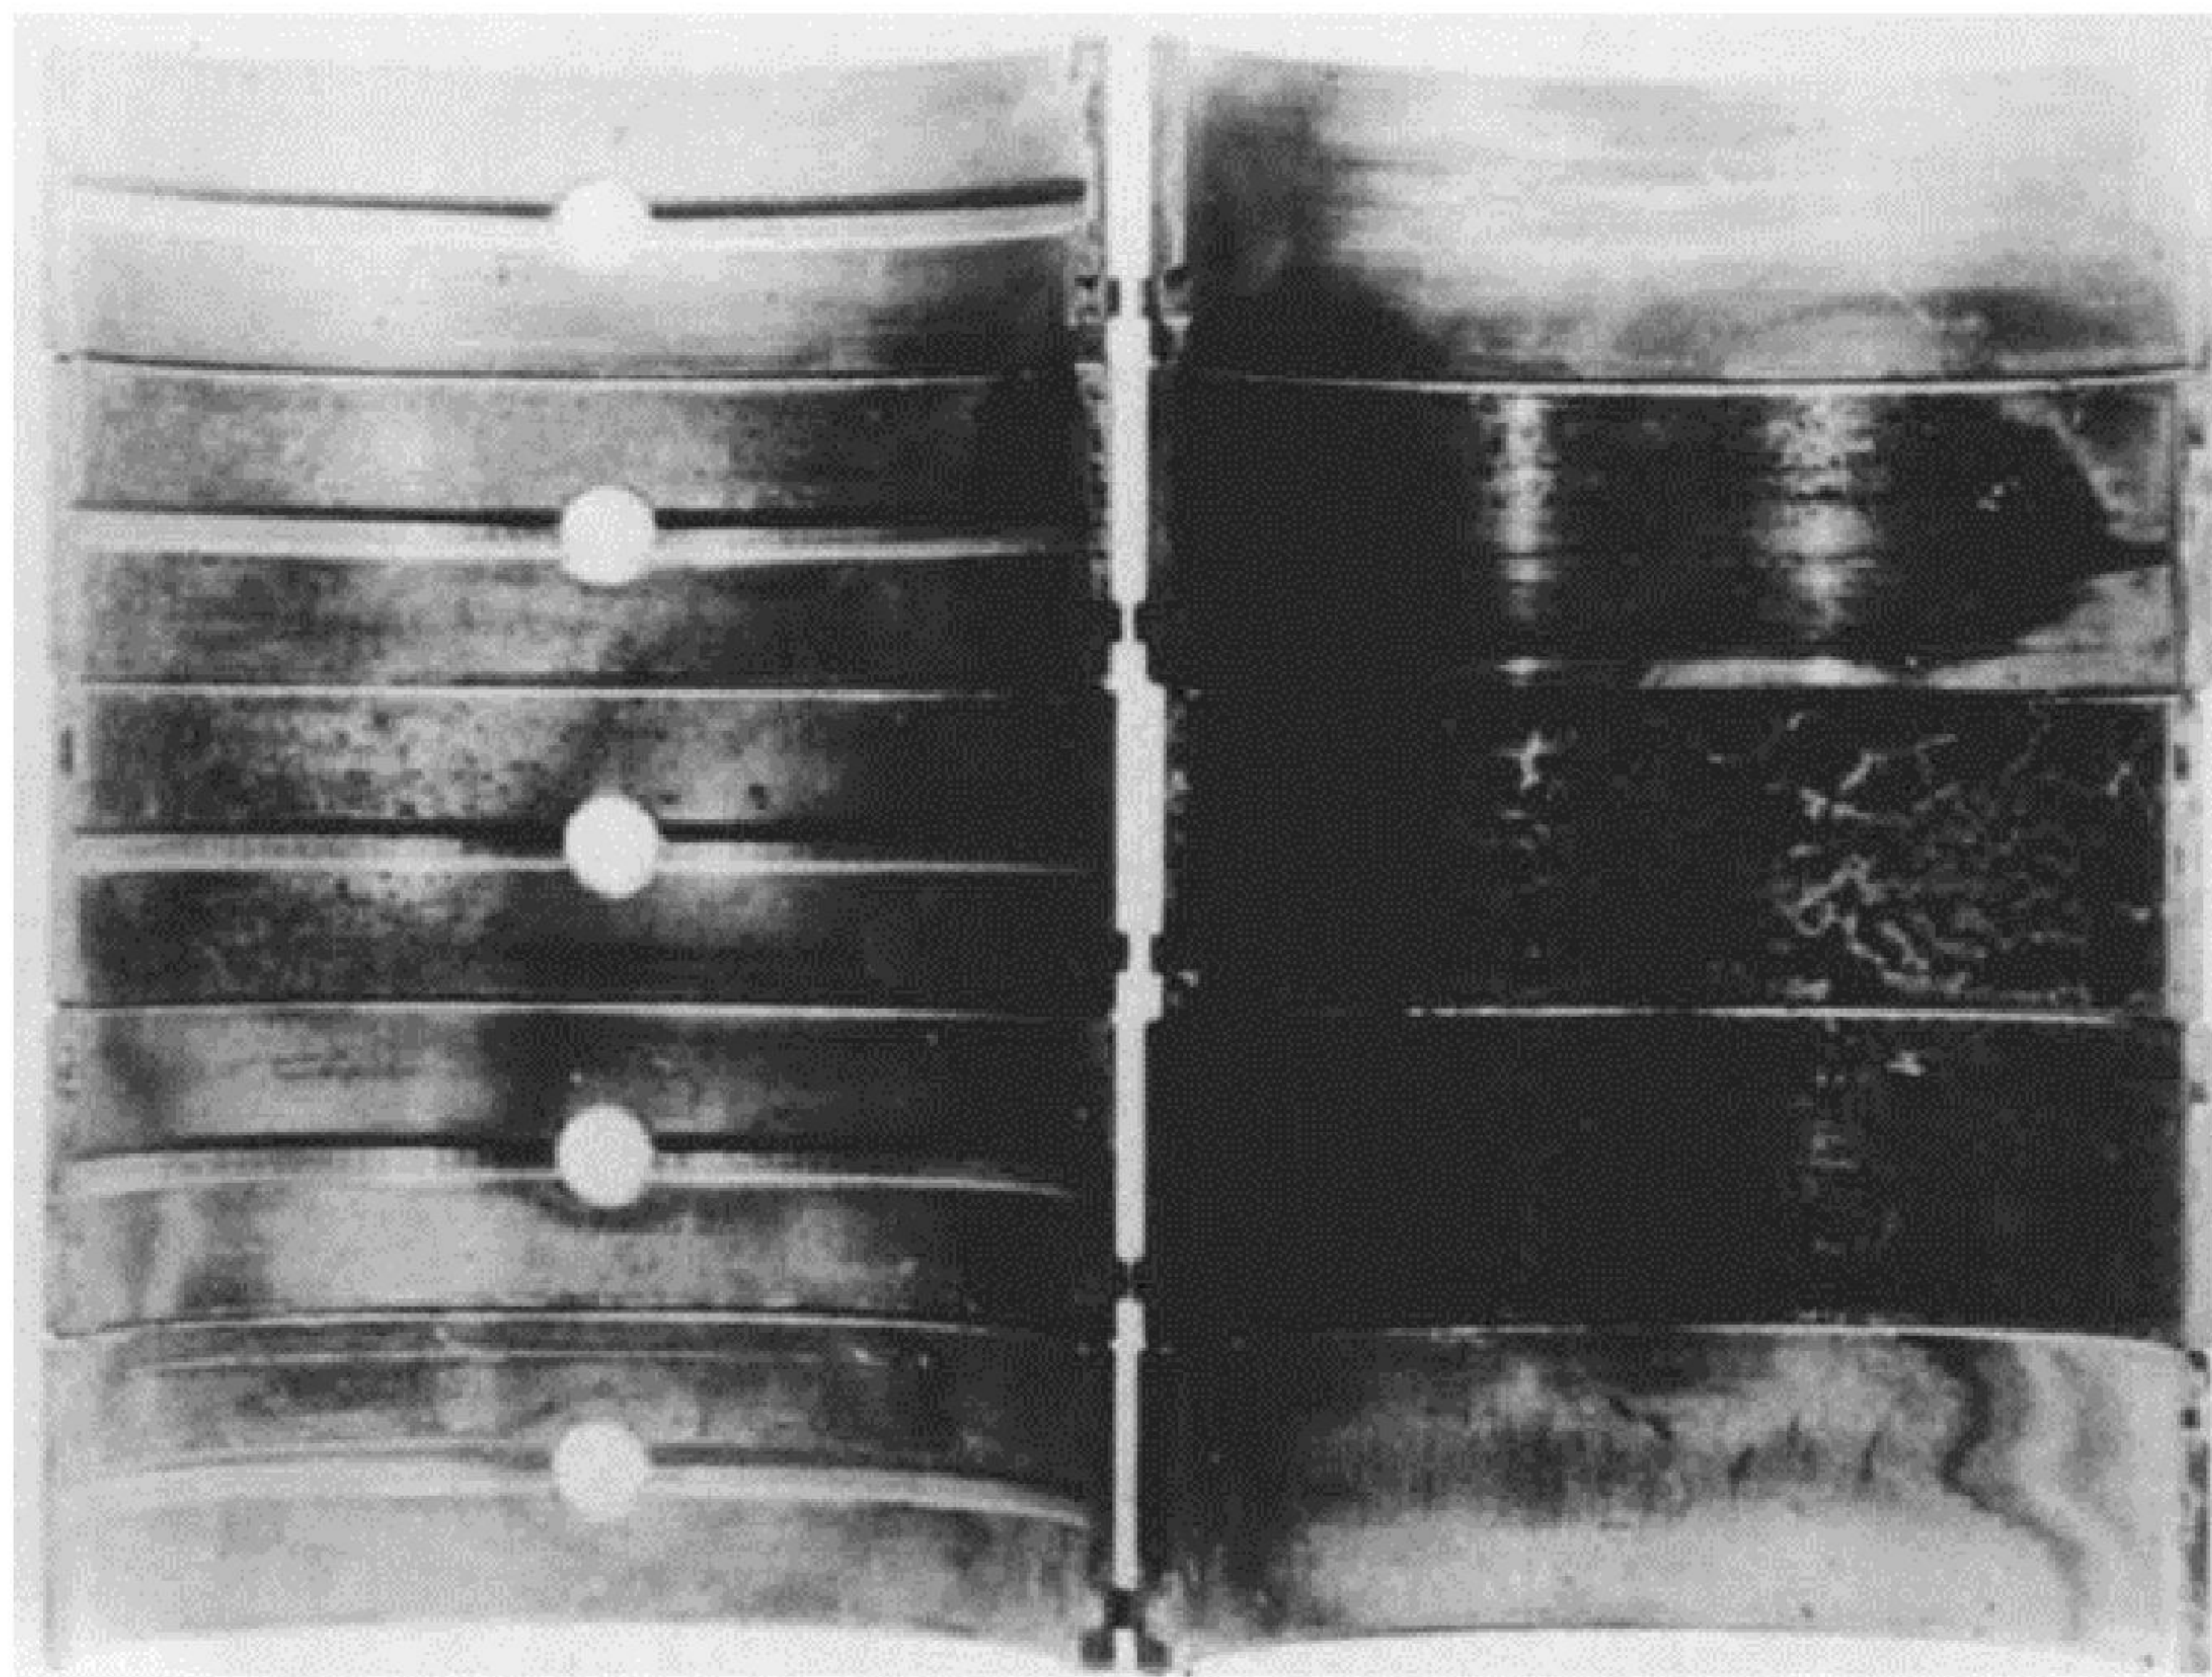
Fatigue of main bearing set due to a distorted crankcase.
